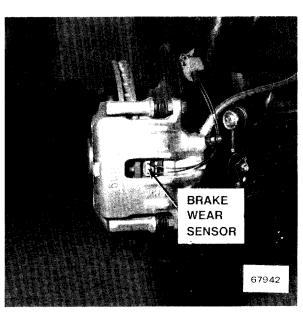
LH Front Brake Assembly (Wheel Removed) (RH Rear Similar)
